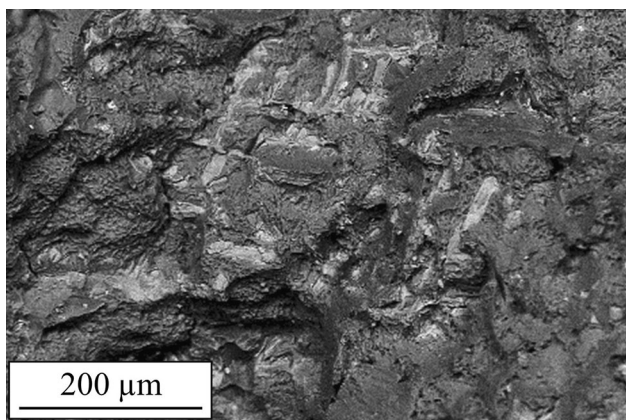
Detail of intermetallic particles emerging on the fracture surface
